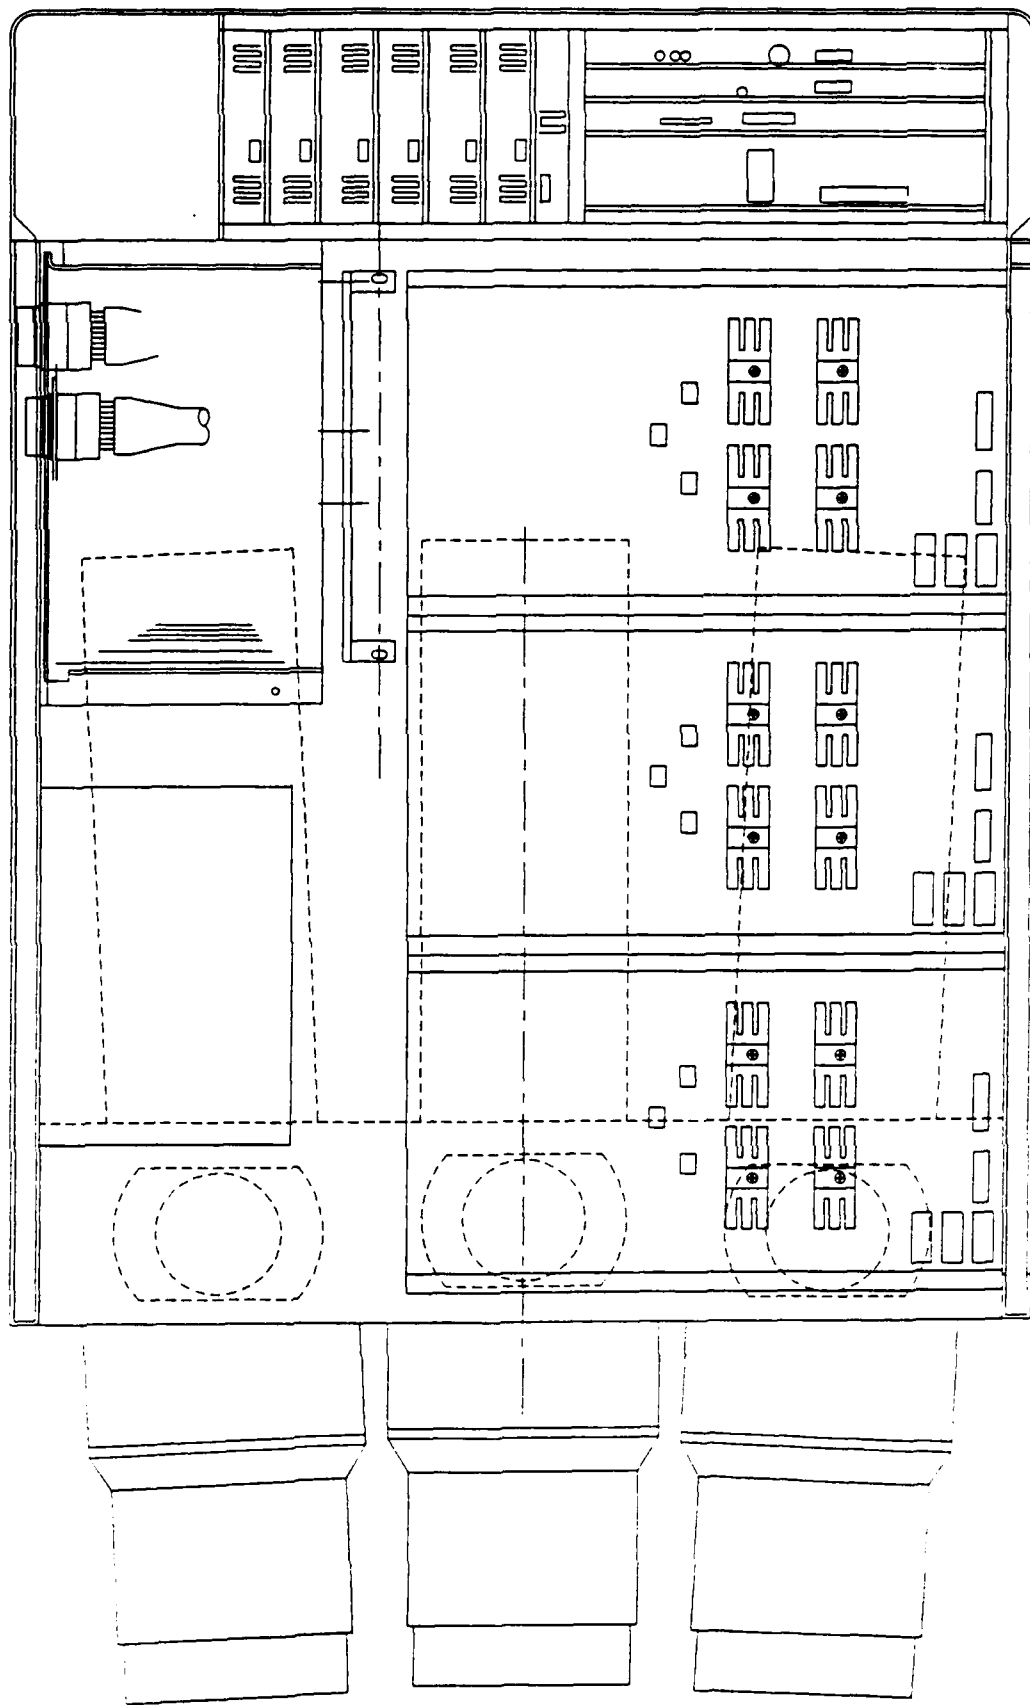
Head Assembly 4" Single Crystal Faceplate Based CRTs
